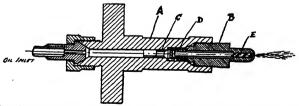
A. Spray valve body. B. Spray nozzle. C. Check valve. D. Spring. E. Spirals on valve stem periphery.
